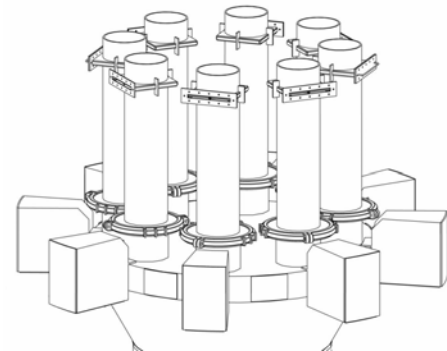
STI Orifice Housings installation design "as installed" at a typical mill discharge location
